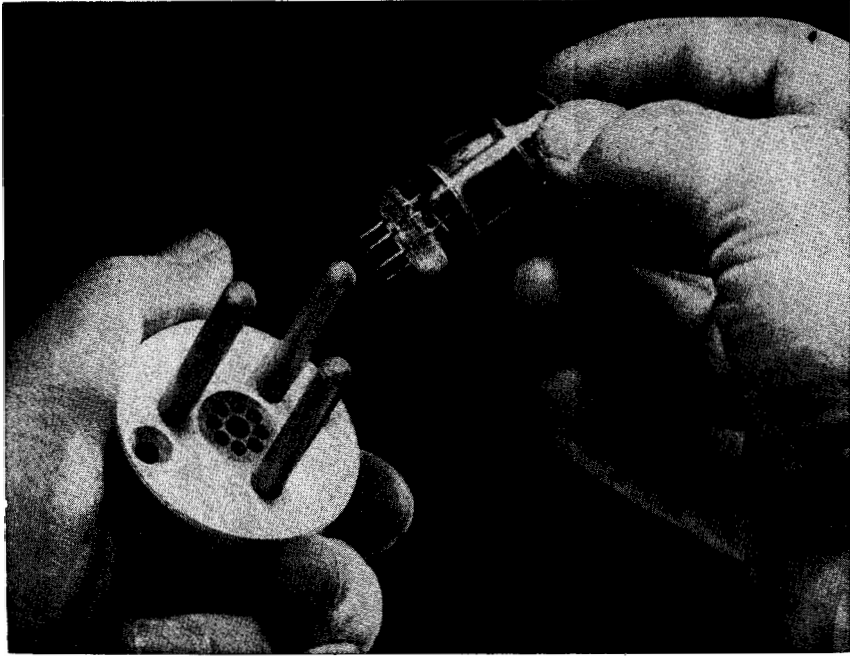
Pin-straightening tool for miniature tubes. Inserting tube in tapered holes does the straightening job automatically. These pins often break off when straightened with pliers or with a screwdriver. (Sylvania photo)
